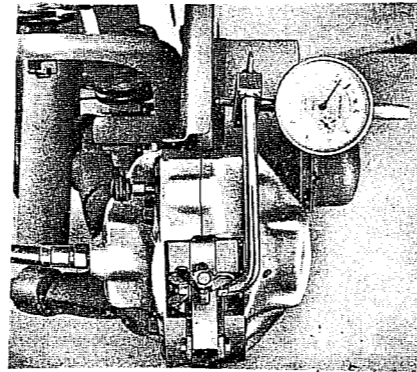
Checking the brake disc run-out with a dial gauge.
